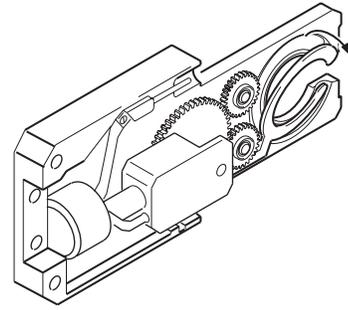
Lifting the Weld Head Brush for Cleaning
